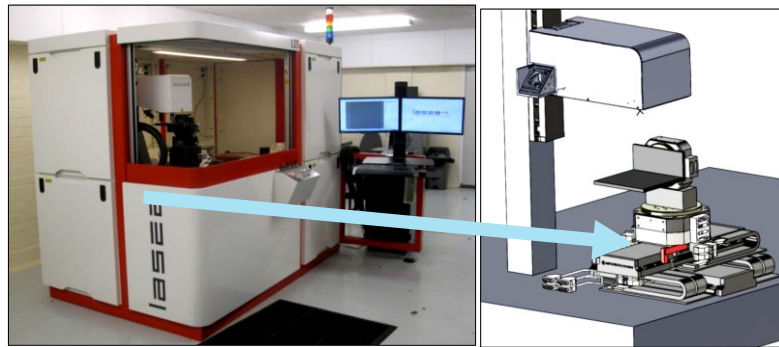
Reconfigurable Lasea Multi-Axis Laser Micro Machining platform.
